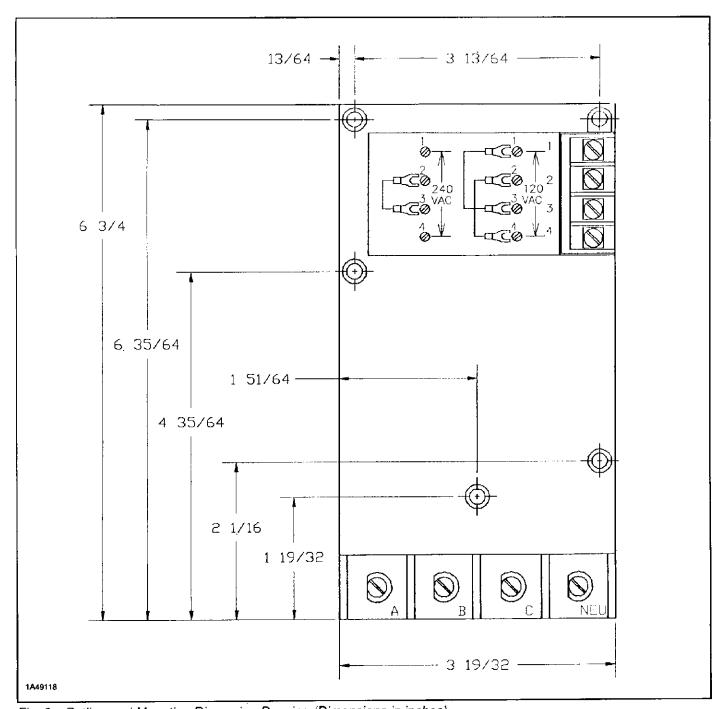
Outline and Mounting Dimension Drawing (Dimensions in inches)
